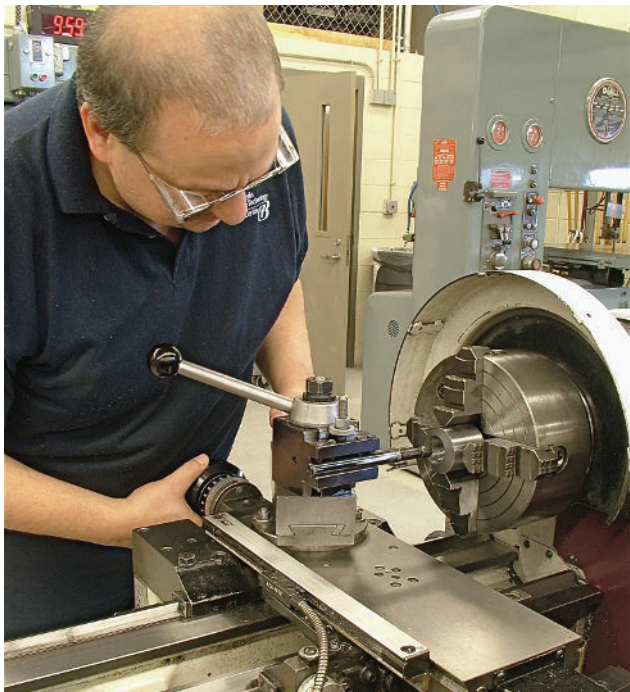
This machinist is cutting an internal thread in a custom part on a conventional lathe.
